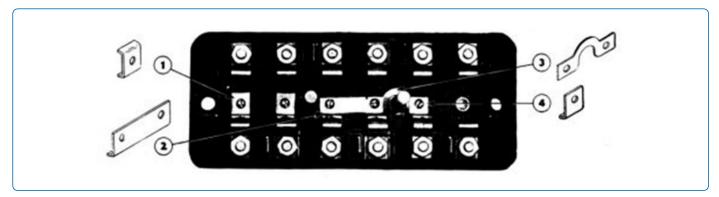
shows a composite assembly of a 6-pole PK-2 test block with auxiliary contacts and jumpers, as follows:
